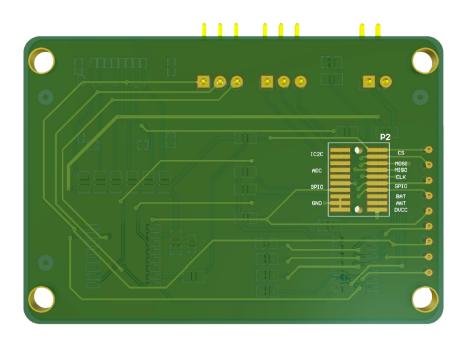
Bottom 3D view of the DB Memory PCB.
